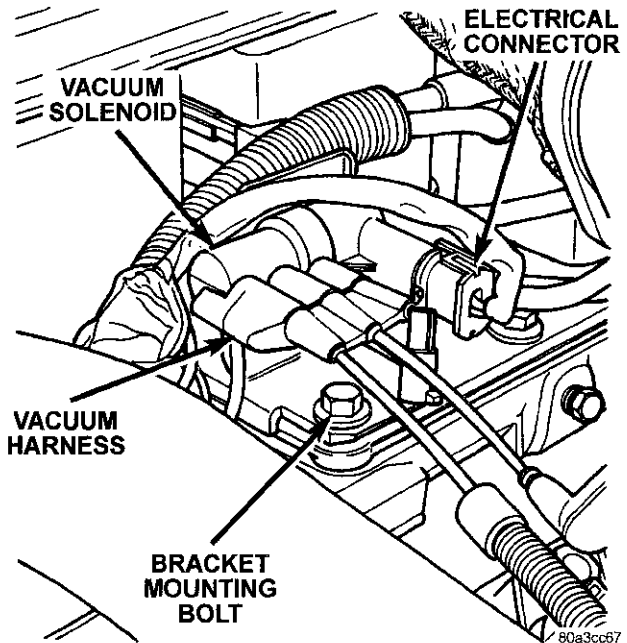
EGR Valve Vacuum Regulator Solenoid THROTTLE POSITION SENSOR
